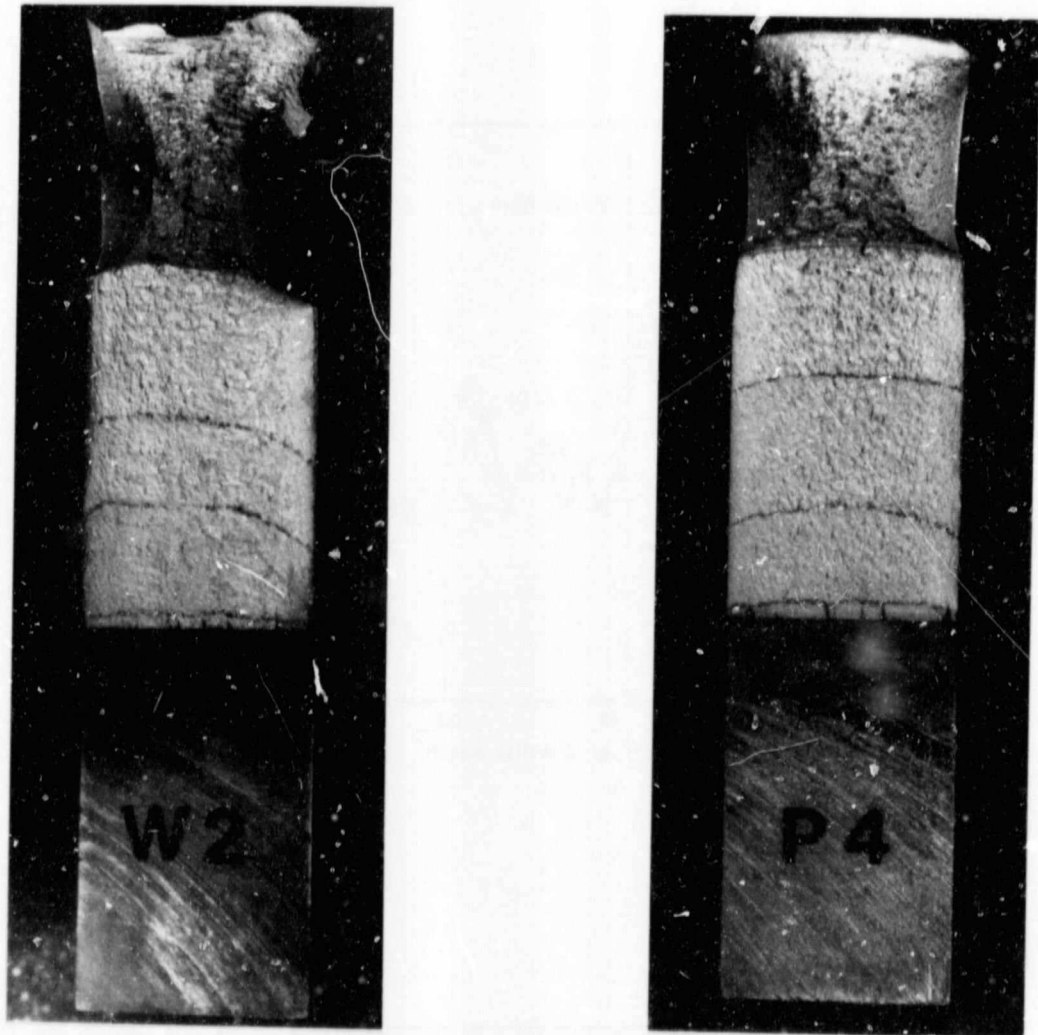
Fracture surfaces of specimens W2 and P4. Note the uneven crack growth in the welded specimen. (Beachmarks highlighted for clarity).
